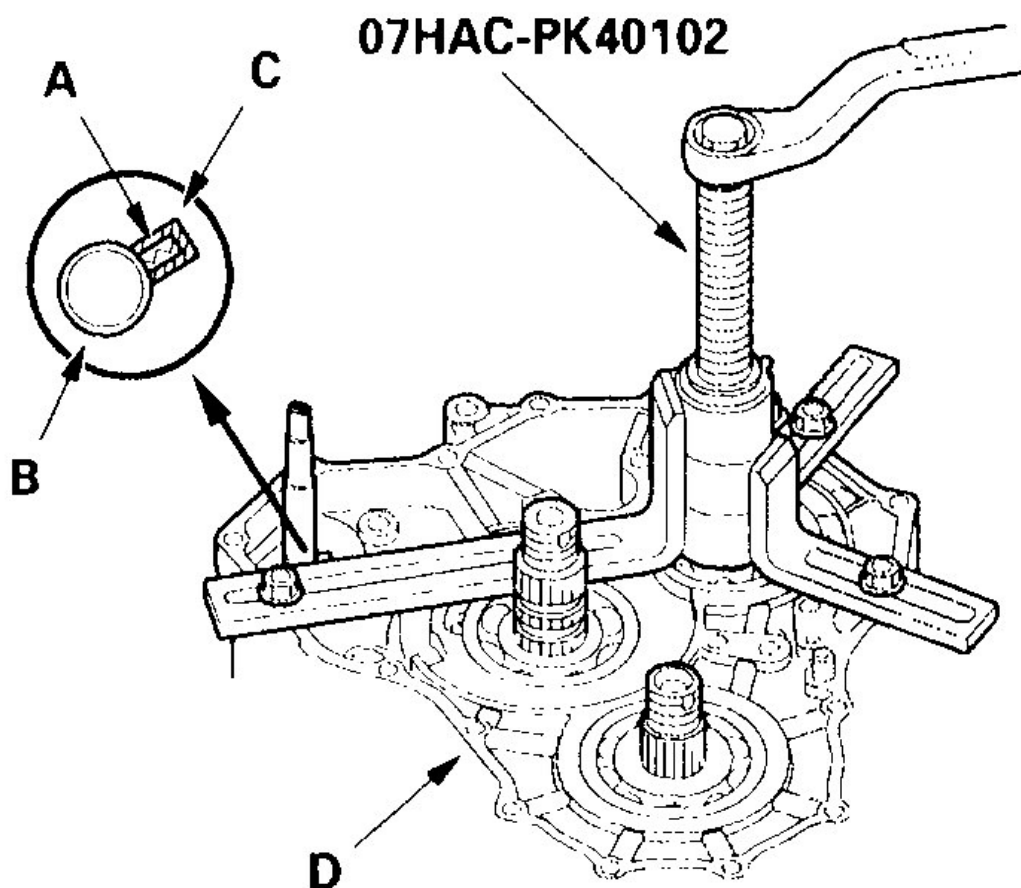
Removing Reverse Idler Gear Shaft Holder
